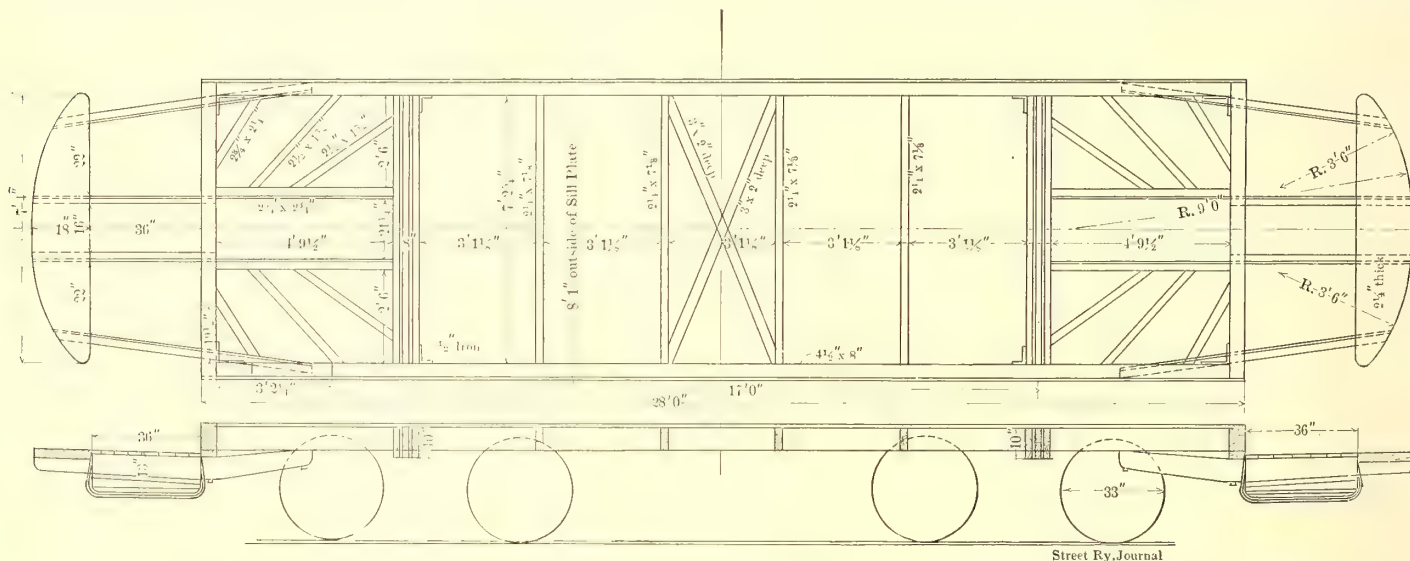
PLAN OF FLOOR FRAMING OF 28-FT. CAR, STANDARD CONSTRUCTION FOUR YEARS AGO
